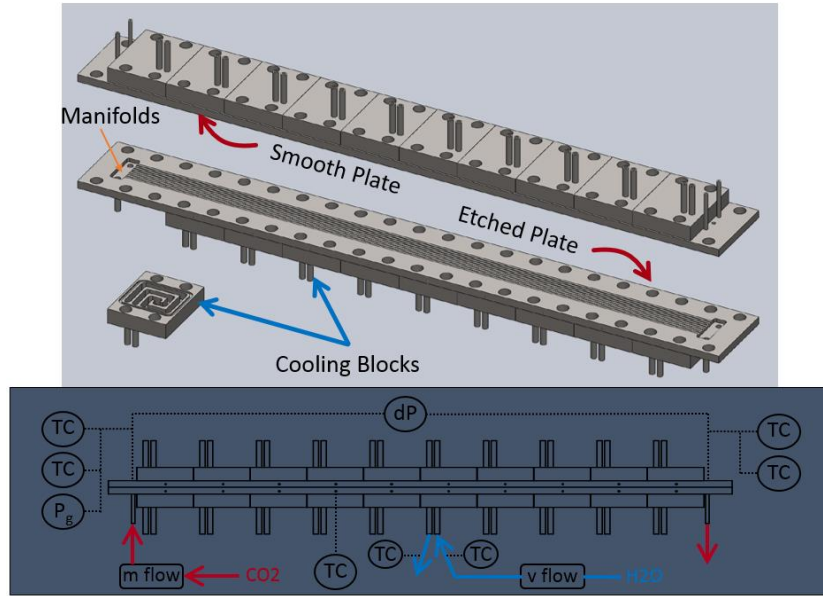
CAD model and Sketch of the heat exchanger showing assembly, fluid paths, and instrumentation ^[23].
